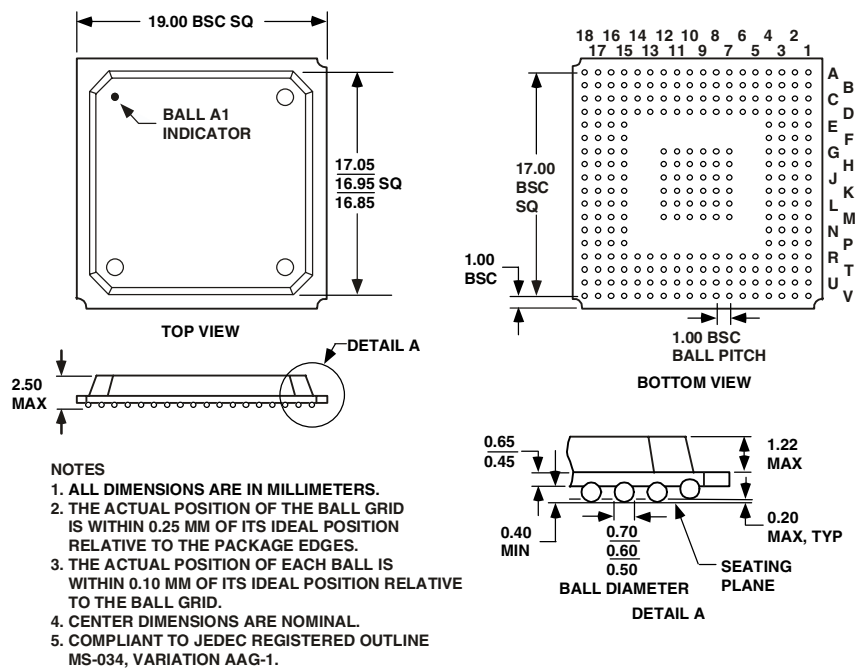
260-Ball Metric Plastic Ball Grid Array (PBGA) (B-260)
